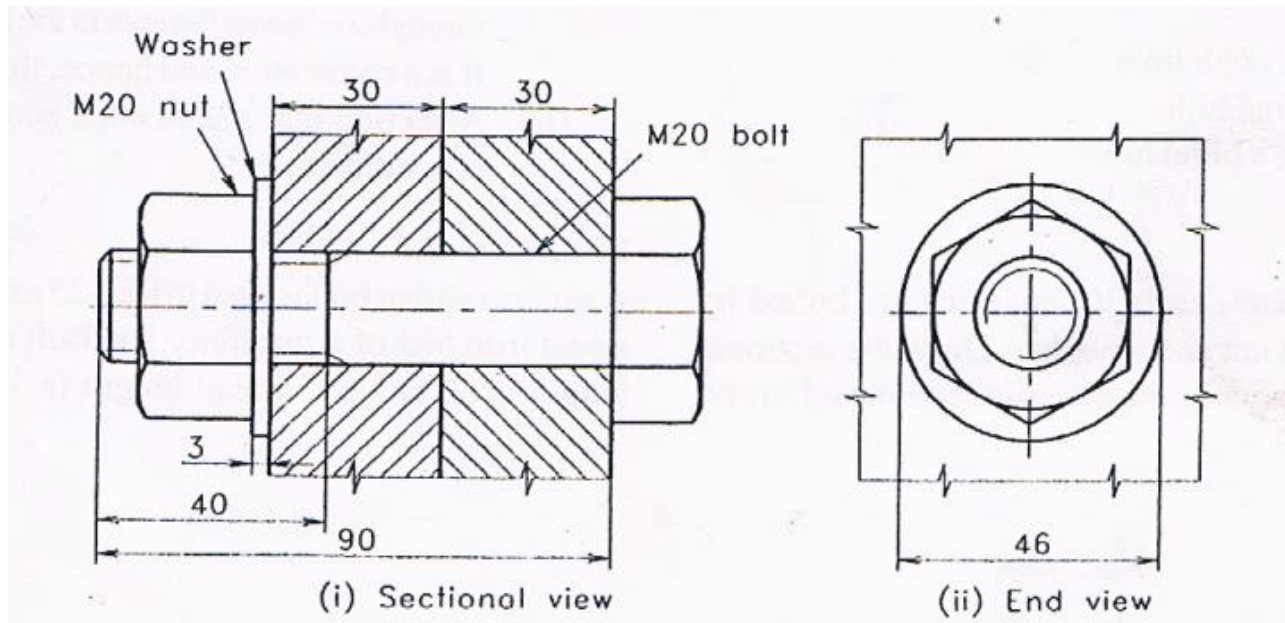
Assembly of hexagonal bolt, nut and a washer
